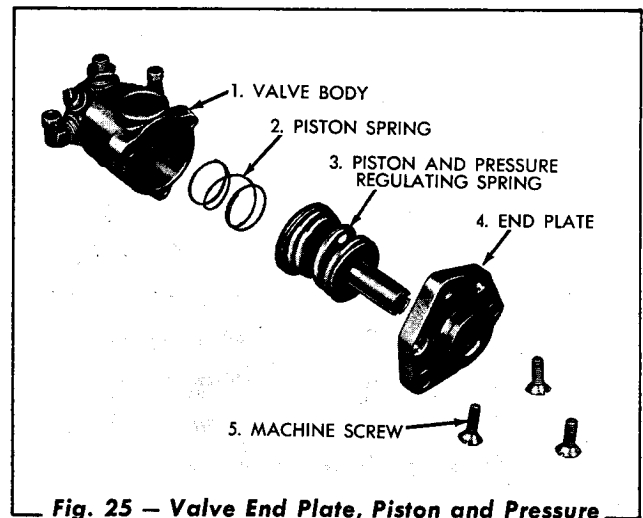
Valve End Plate, Piston and Pressure Regulating Spring, Piston Spring, and Valve Body
